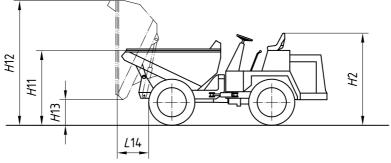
Dimensions of wheeled compact dumper — Four-wheel
